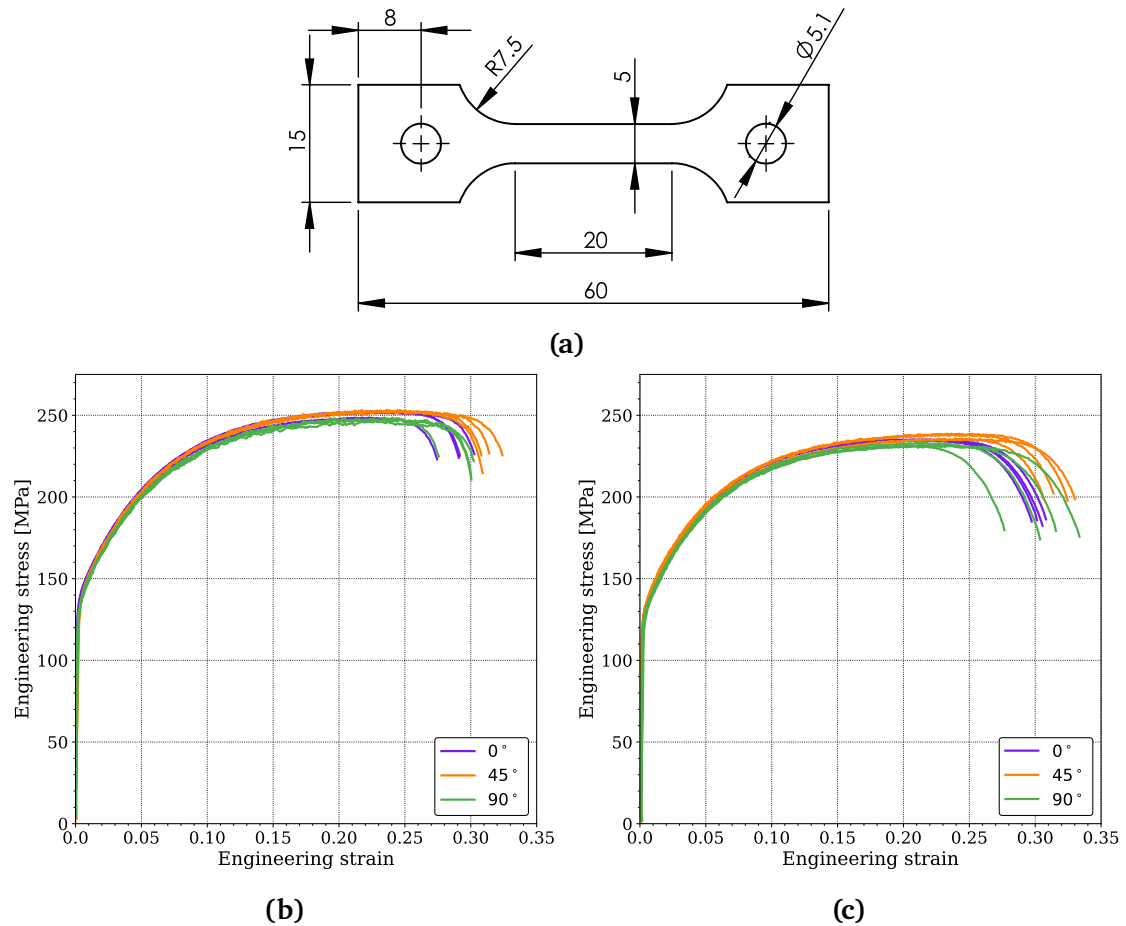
Tensile test: (a) specimen dimensions in mm, (b) 1 mm sheet and (c) 2 mm sheet.
